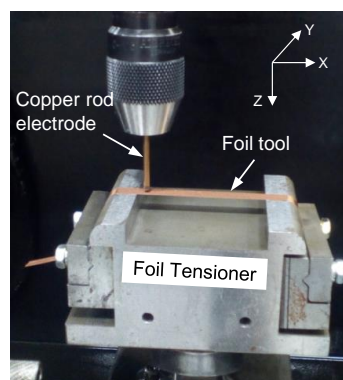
Experimental set-up for machining the holes on the foil electrode.
